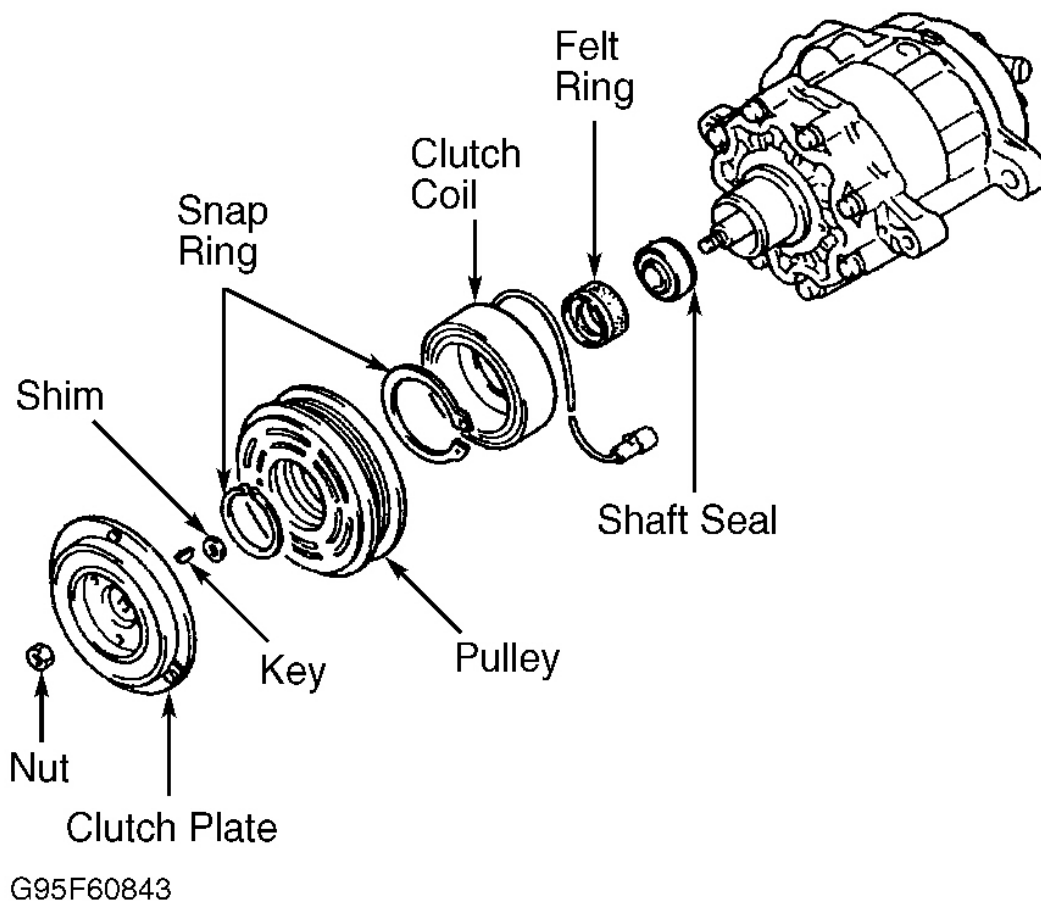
Exploded View Of Compressor (Sanden SD7B10 7-Cyl.)
